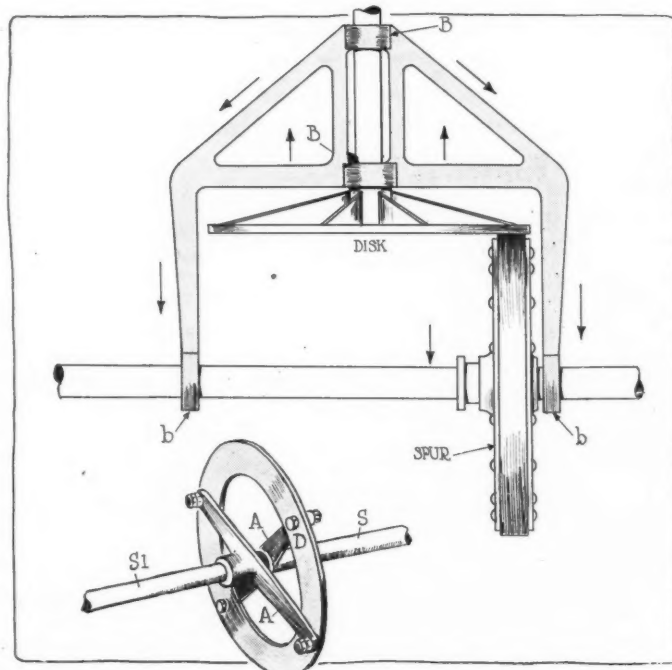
Upper—Form of frame which can be used with small disk construction. Fig. 4—Lower—Plate steel extension joint for friction shaft
